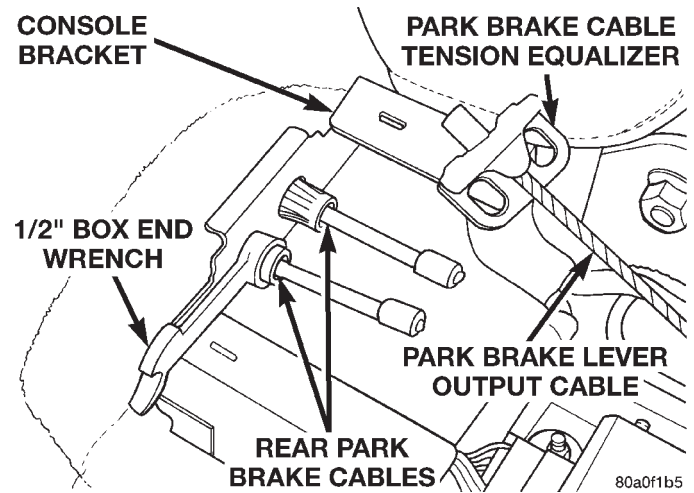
Compressing Park Brake Cable Retaining Tabs
